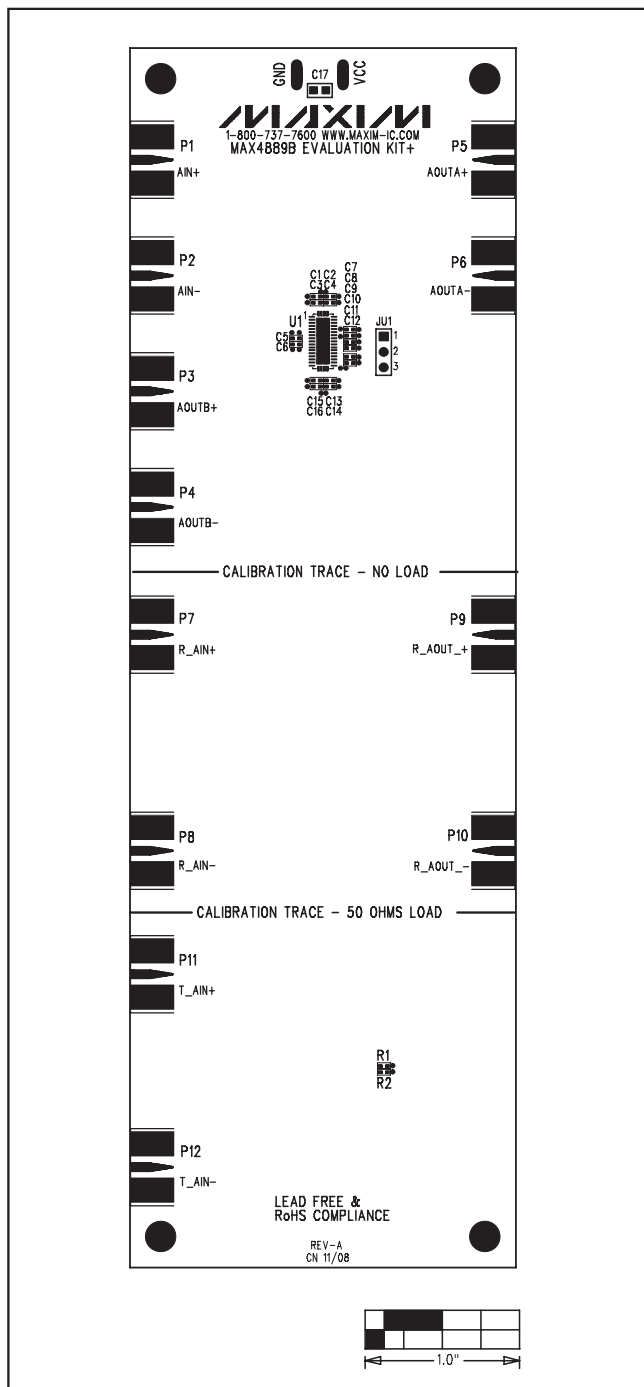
MAX4889B EV Kit Component Placement Guide—Component Side
